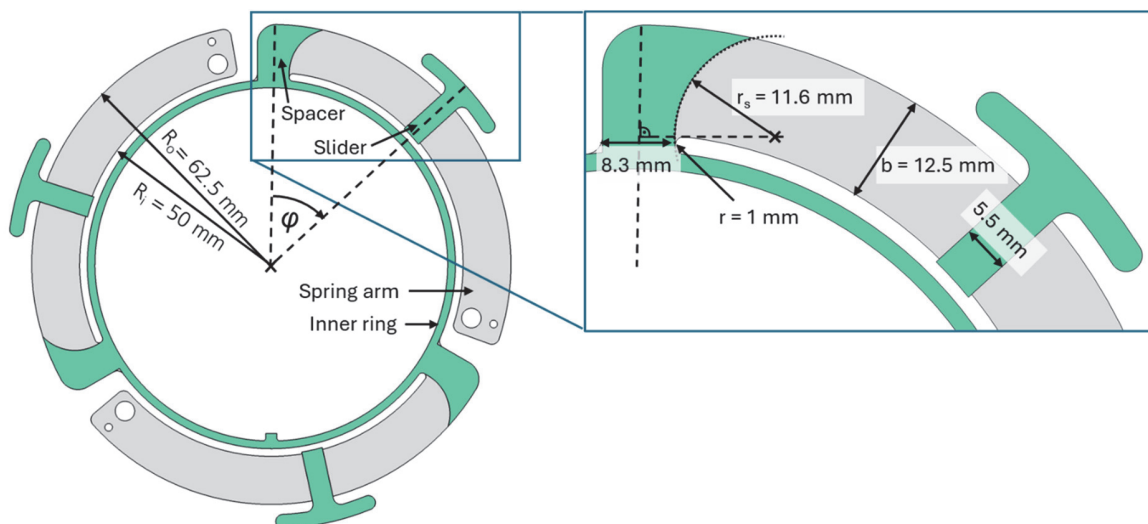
Dimensions of the test specimens with three spring arms, spacers and sliders.
